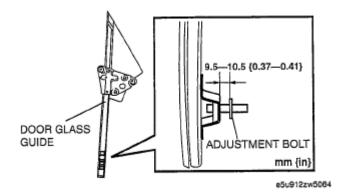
Identifying Door Glass Guide With Adjustment Bolt
